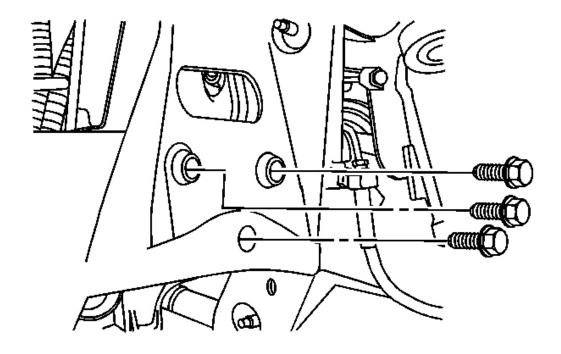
View Of Frame Engine Mount Bracket Bolt Locations Courtesy of GENERAL MOTORS CORP.
